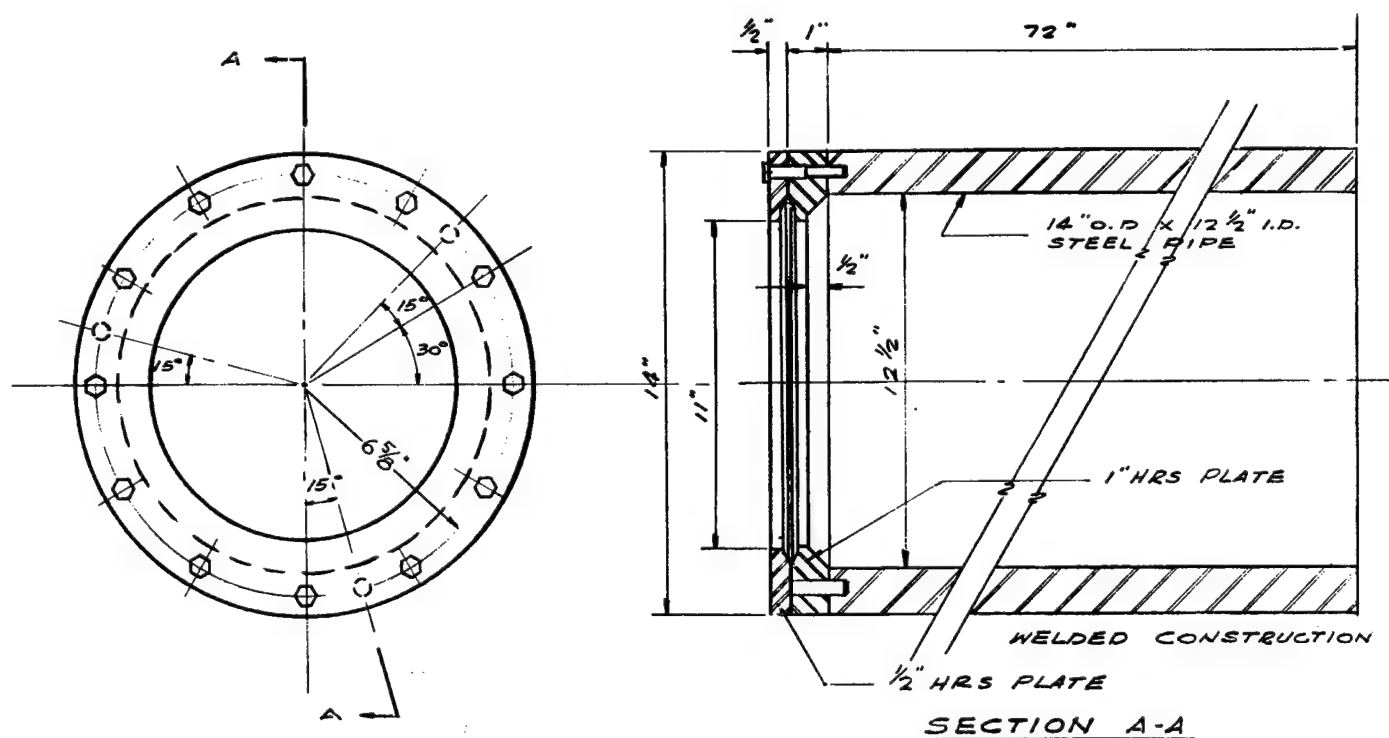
FIXTURE FOR CIRCULAR, FLAT PLATE MODELS
